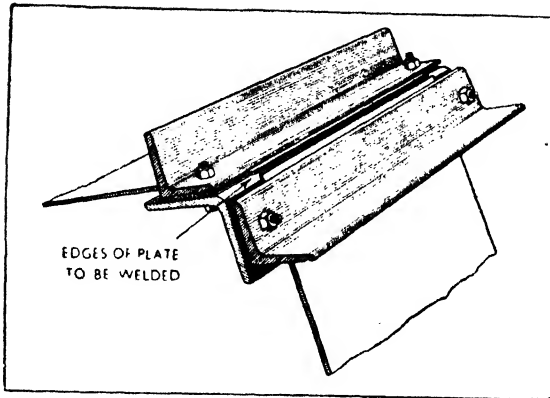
JIG FOR WELDING CORNERS IN SHEET METAL
